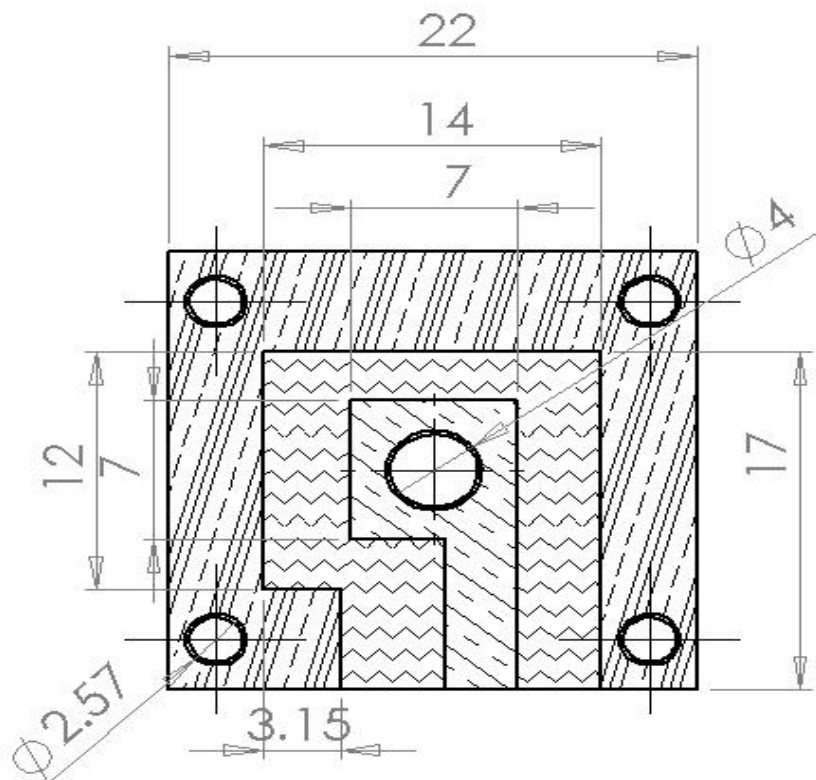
The dimensions of the heating part in vibropad. (in mm)
